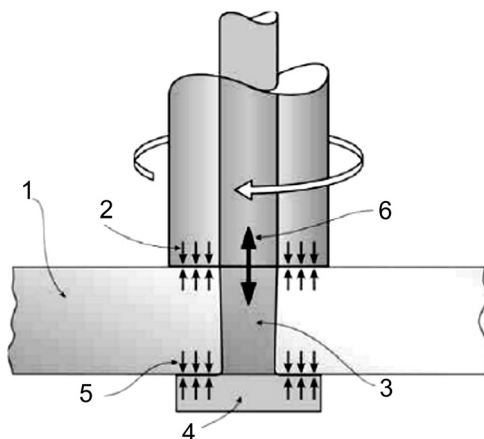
Fixed bobbin tool, 1- workpiece, 2 - bobbin tool
